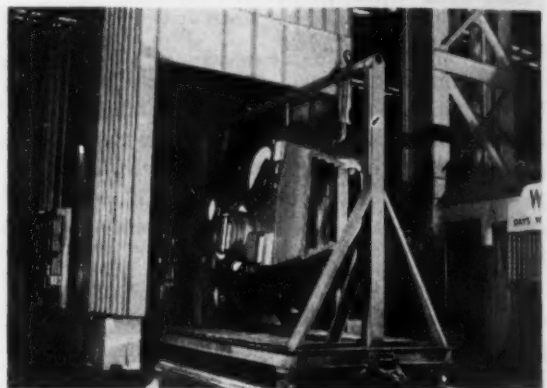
Painted tank turrets leaving the drying oven prior to assembly. Fixtures were designed by Cadillac.
